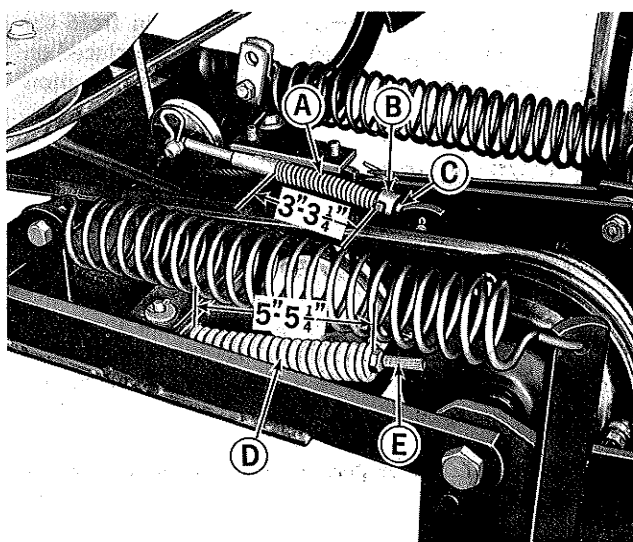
Sickle knife drive belt and cutter bar break away adjustments.
